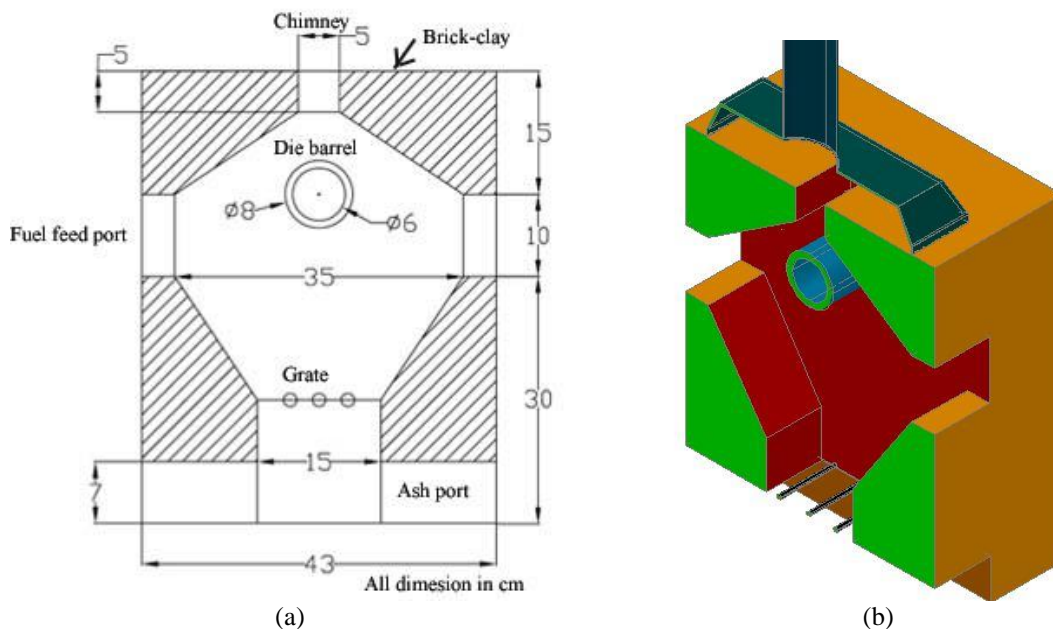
(a) Cross sectional view of die-heating stove and 3D view of cross section of die-heating stove for briquetting machine
